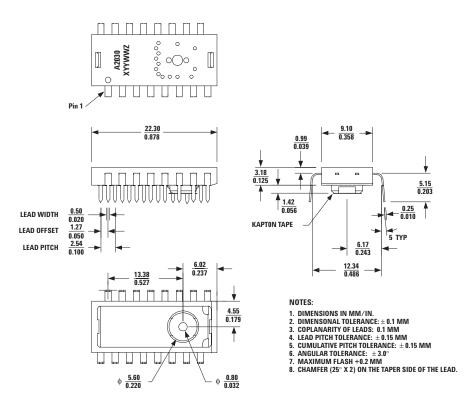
Package outline drawing of ADNS-2030 optical mouse sensor.
